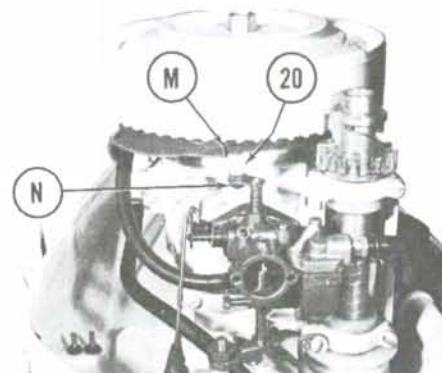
The carburetor throttle valve should just begin to open when mark (M) on cam is aligned with center of roller (20).
